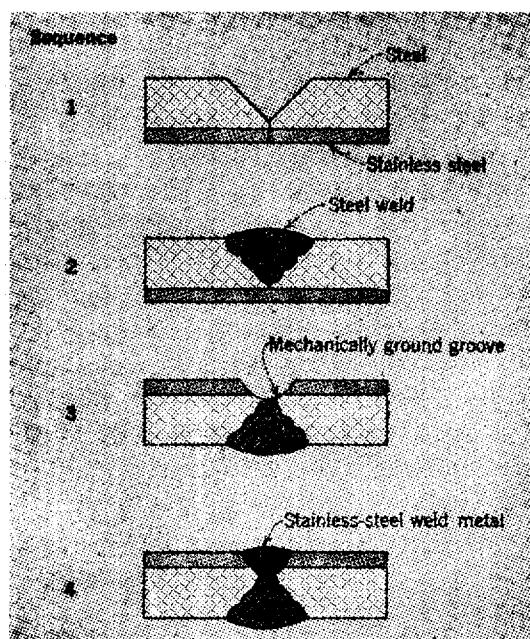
Welding procedure minimizes dilution of clad
